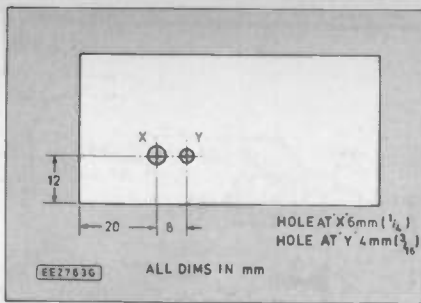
Lamp and photodiode hole drilling details in end of case.
